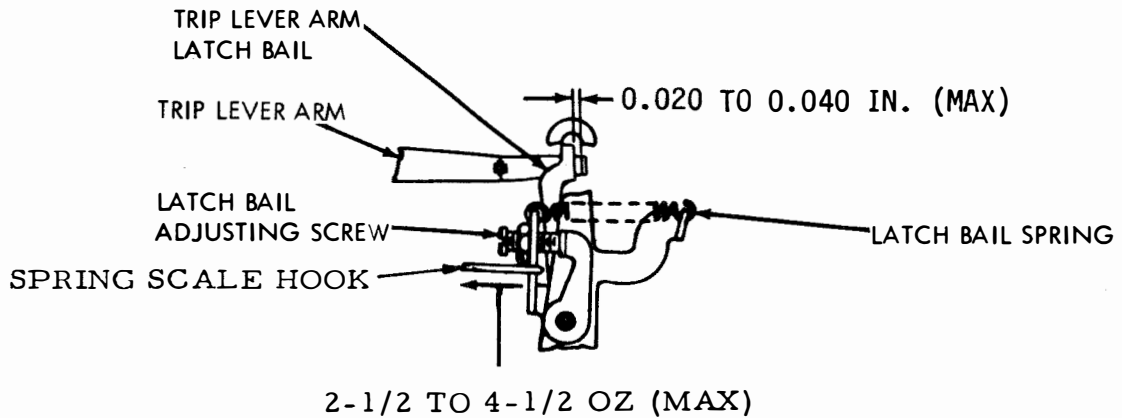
Trip Lever Arm Latch Bail and Latch Bail Spring, Left Side View
